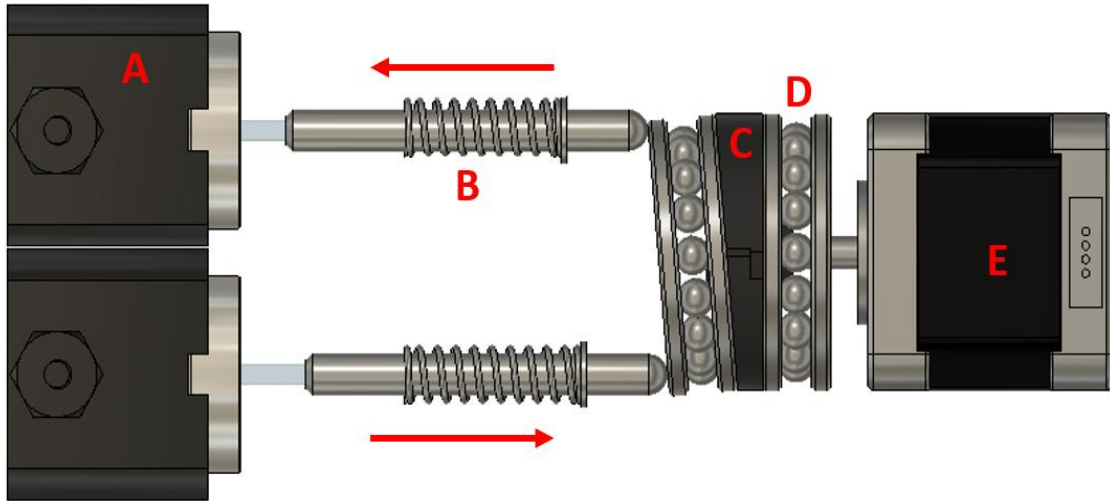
Mechanical setup of the swashplate pump. Legend: (A) Pump Heads; (B) Pistons; (C) Swash Plate; (D) Thrust Bearing; (E) Stepper Motor.
